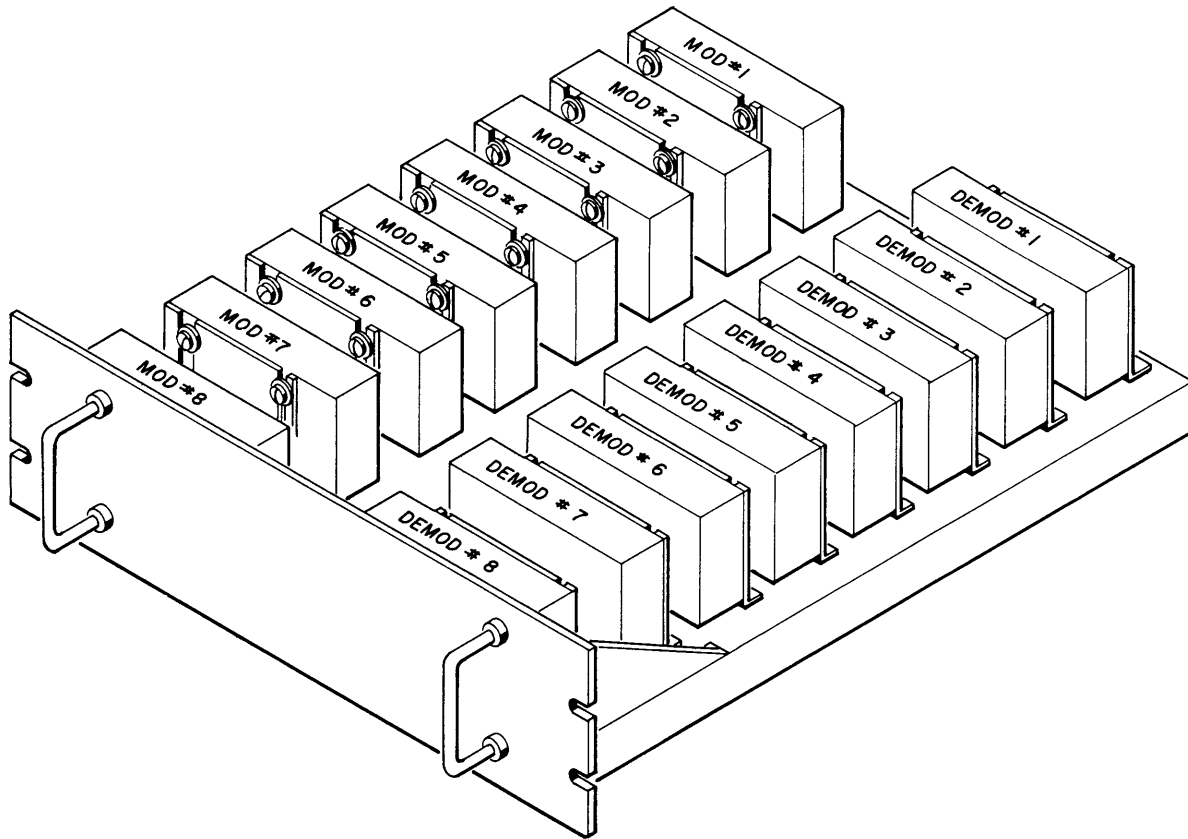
AN/FGC-60/24 Tone Converter Drawer, Isometric View
